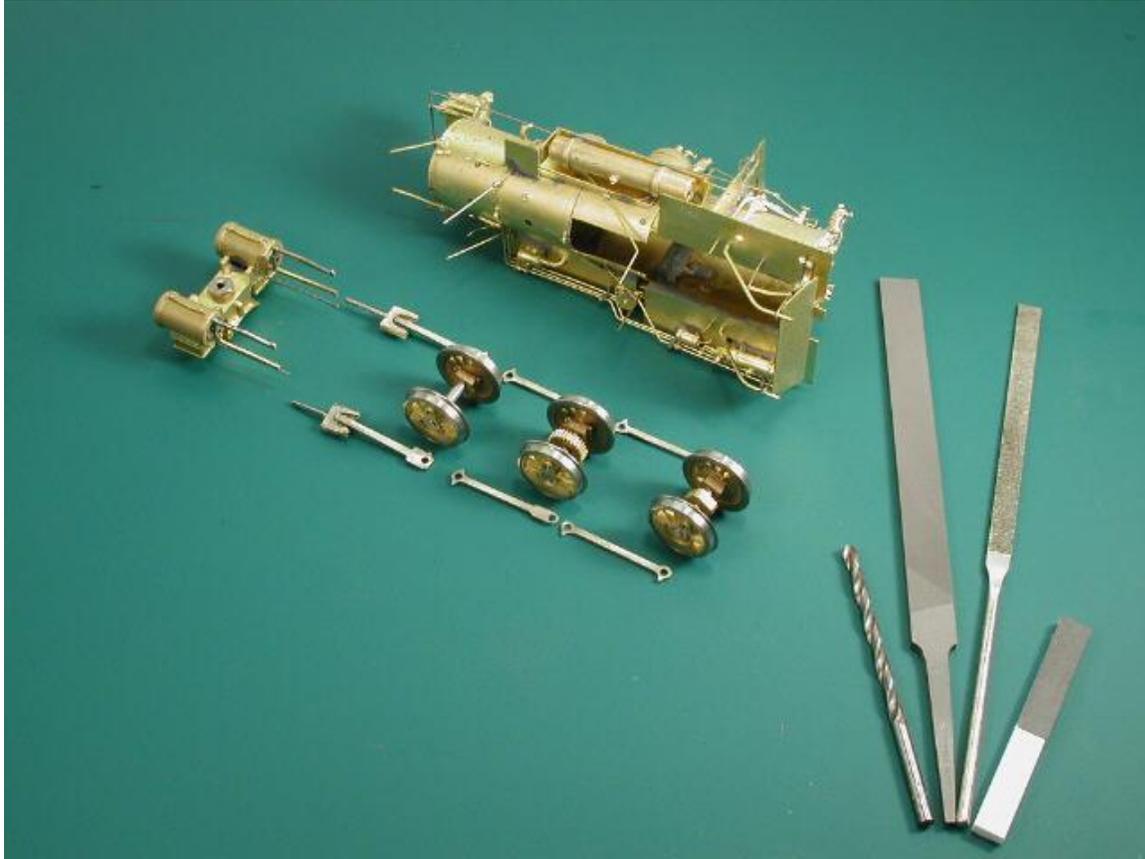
At this stage, we will want to identify and remove any additional sources of friction that may cause binds to the mechanism. An initial approach is to examine all parts that are put into motion and remove any burrs that are caused by manufacturing. As an example, gently slide your fingers over the inside edges of the side rods – feel the sharp edges? We need to remove them, to prevent any chance of binds. Same for the slide valve guides, etc.. Tools as illustrated include a drill bit for the side rod holes, fine-toothed files, and a polishing stick made from a piece of 1/8" x 1/4" styrene strip with a small piece of 660 grit sandpaper attached with spray adhesive. The polishing stick is used to polish all bearing surfaces on the drivers, as well as the side rods.
